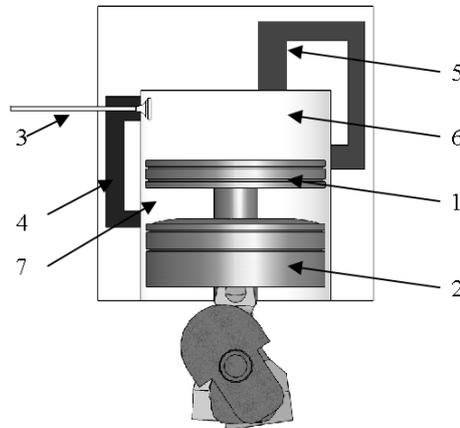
Schematic illustration of designed engine: 1 – Displacer piston; 2 – Power piston; 3 – Valve; 4 – Cooler; 5 – Heater; 6 – Expansion space; 7 – Compression space
